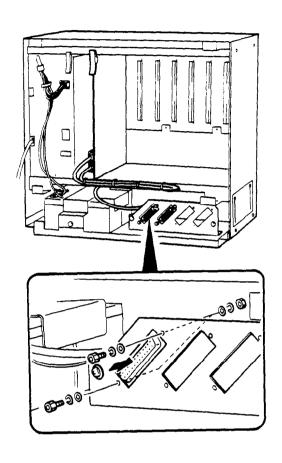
Connecting the MIF Cable Assembly and the MIF-F(A)-10 KTU to the ESF-SB-10 KSU
